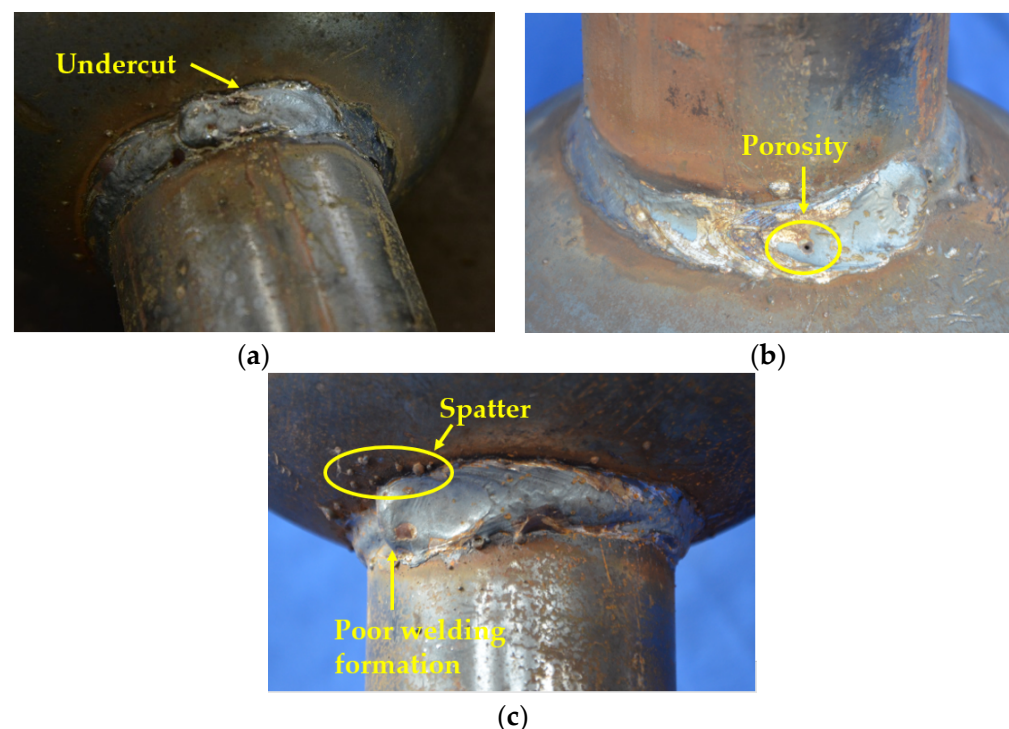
Defects in weld appearance. (a) Undercut; (b) Porosity; (c) Spatter and poor welding formation.
